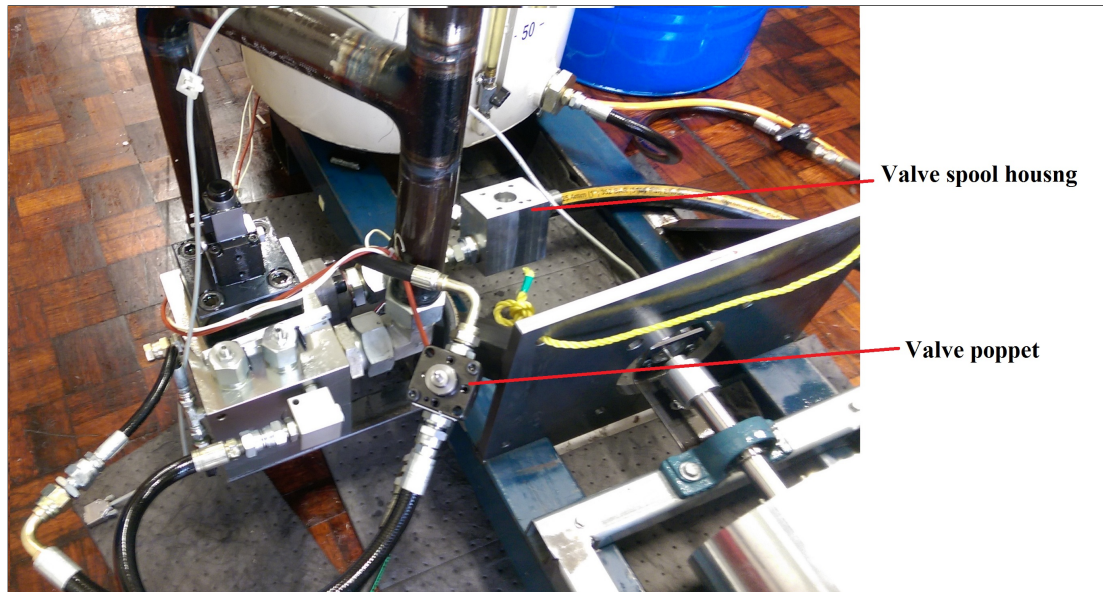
NG-16 valve poppet and bolts stripped out of it's housing manifold socket due to over pressure
